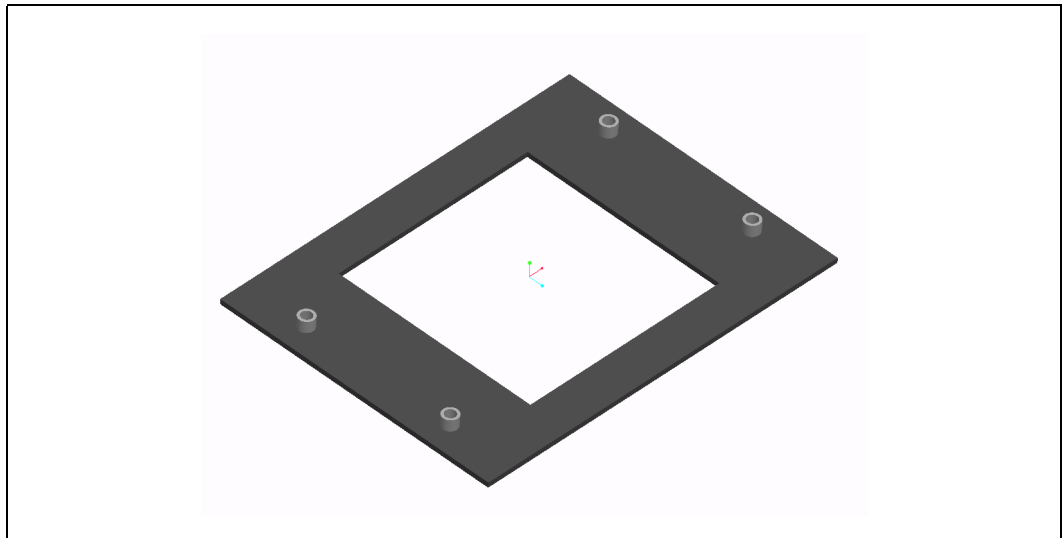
Screw/Spring/Retainer Assembly for AdvancedTCA\
